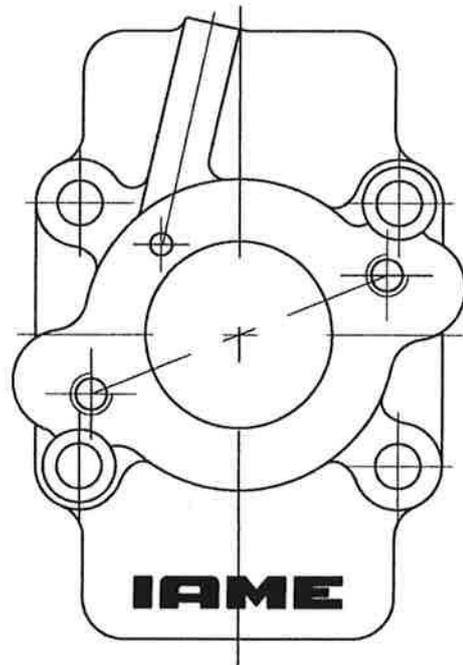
PHOTO IDENTIFICATION CARBURETTOR INLET CONVEYOR
